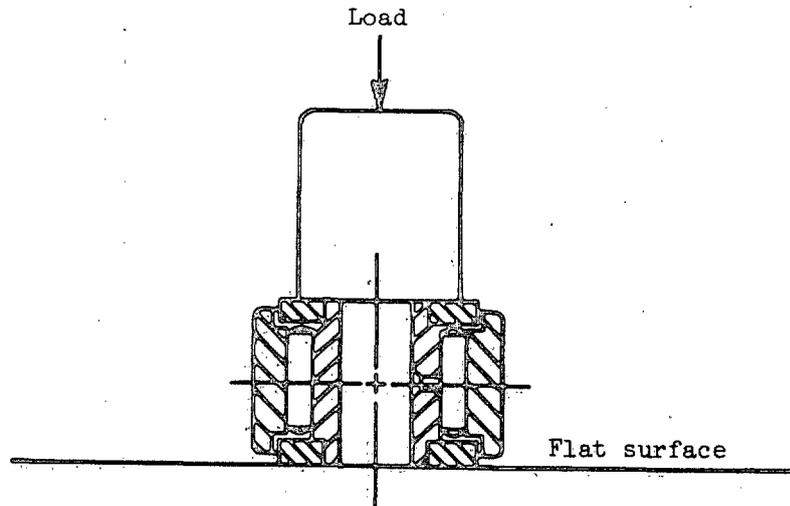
Axial compression load test for types I, II, III, IV, V, VI and X bearings.
